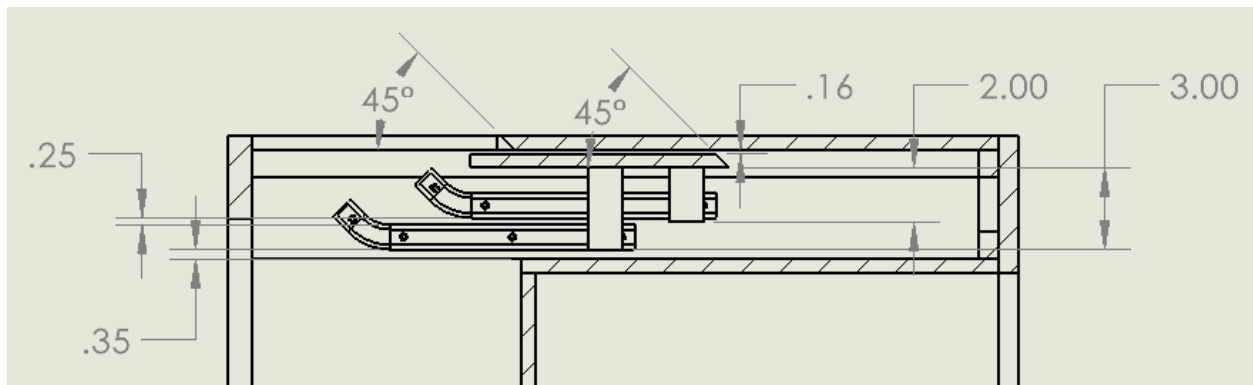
Cross sectional front view of the dimensions of the project
